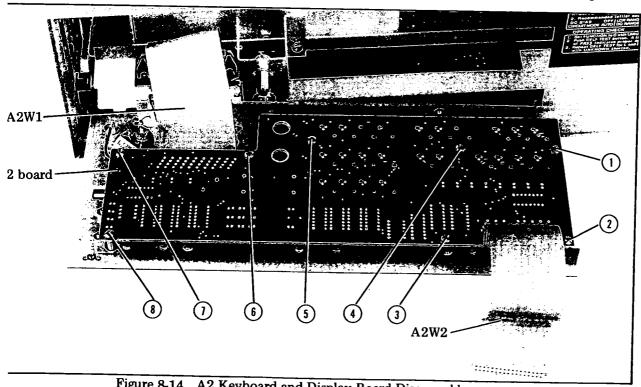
A2 Keyboard and Display Board Disassembly.
